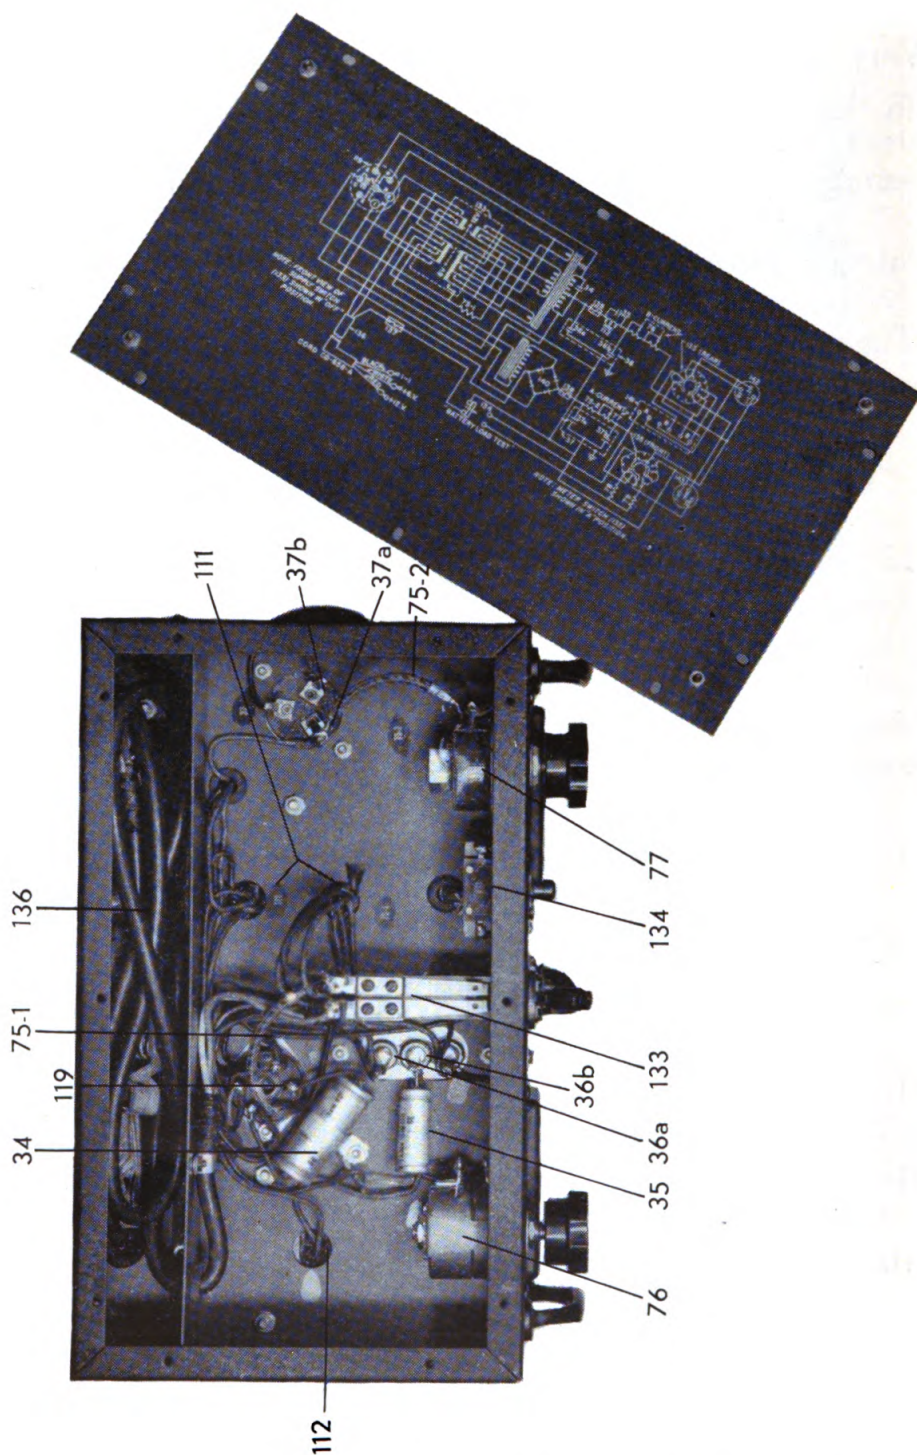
Battery Charger PE-128-A, Bottom View With Bottom Plate Removed
